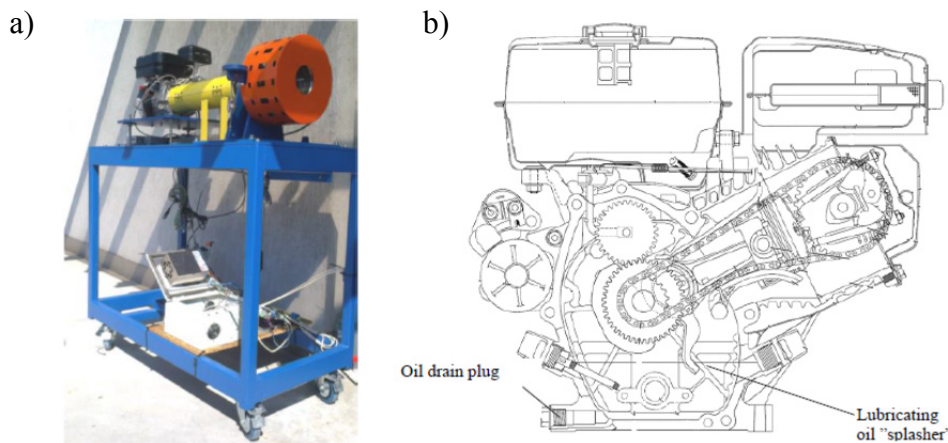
View of the Robin-Subaru EX17 engine test stand (a) and the engine cross-section (b)
